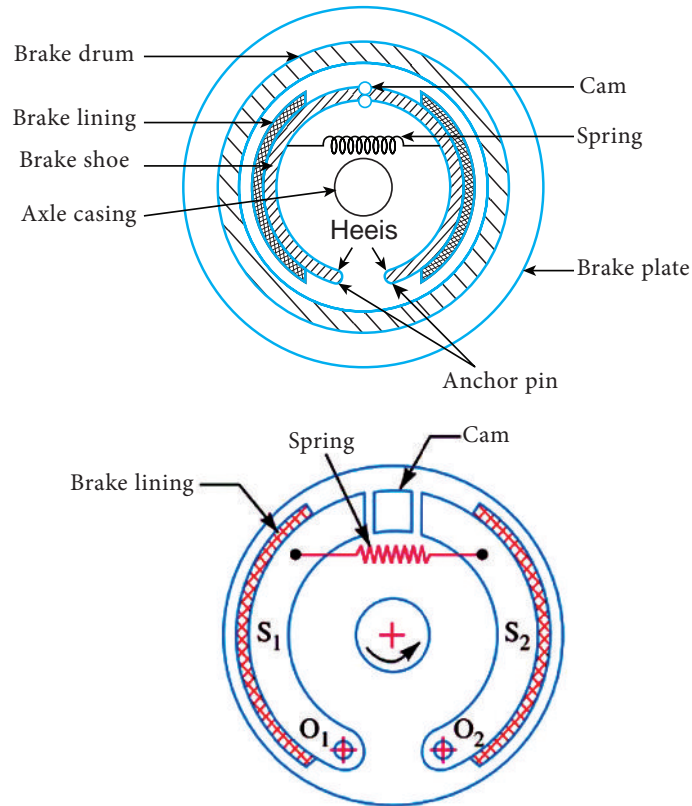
View of the Internal expanding shoe brake and the forces acting on it
